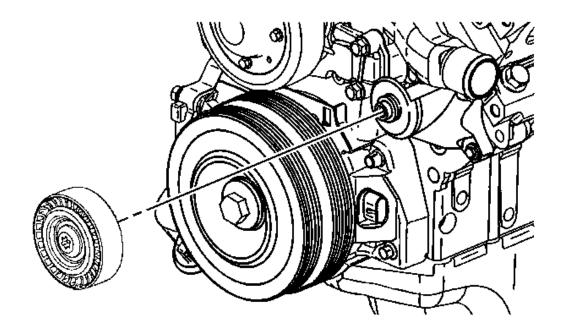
Identifying Drive Belt Idler Pulley - Lower Courtesy of GENERAL MOTORS CORP.
